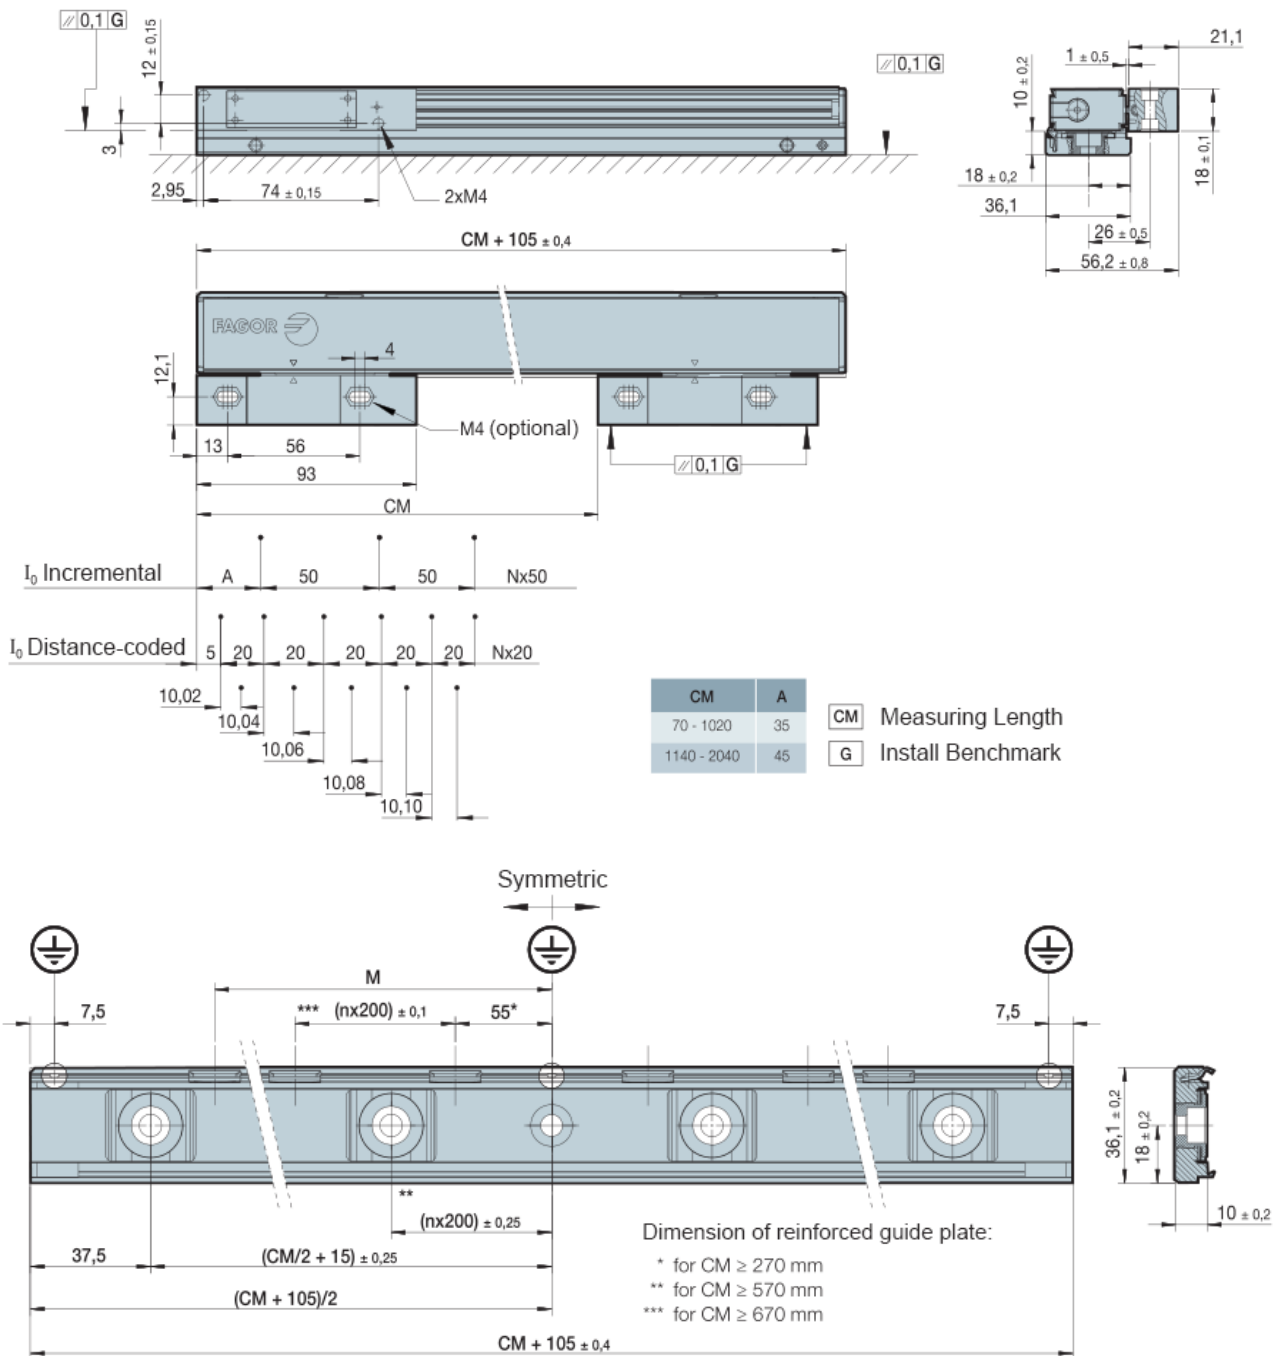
Dimensional drawing of FAGOR incremental SV2 series scale
